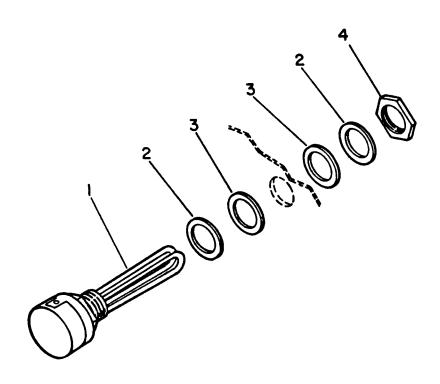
ELECTRIC TANK HEAT W-0-95377 HEATING ELEMENT ASSEMBLY
